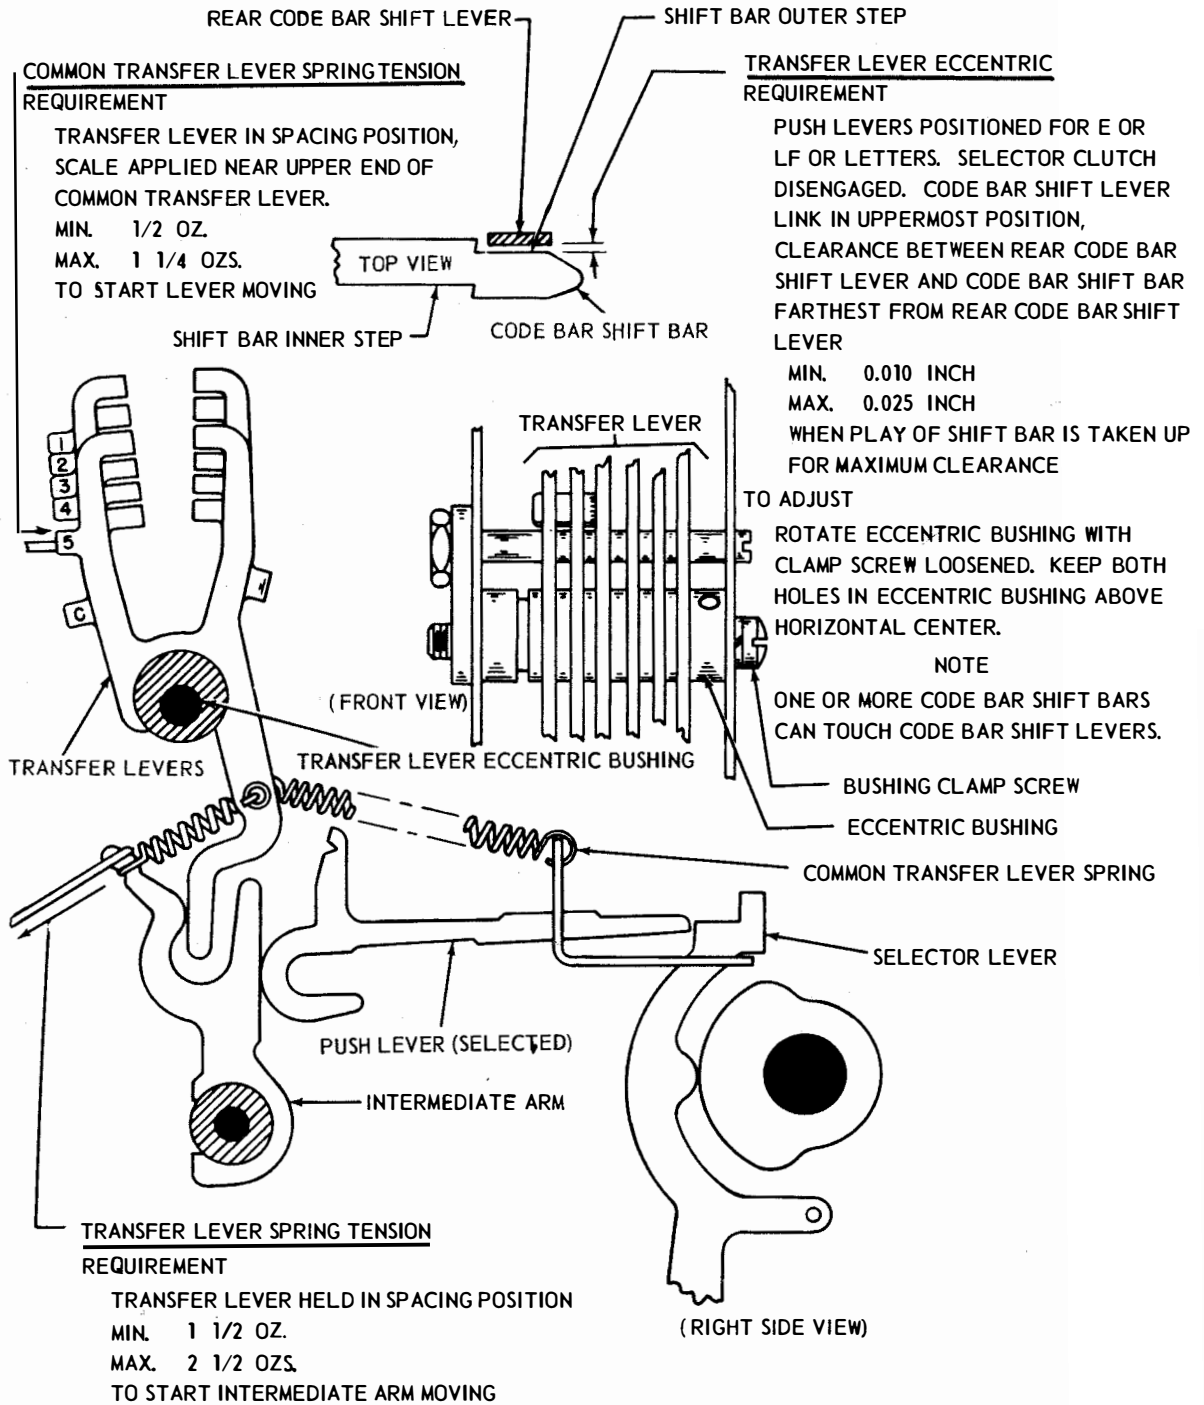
Automatic Typewriter, Code Bar Shift Mechanism
